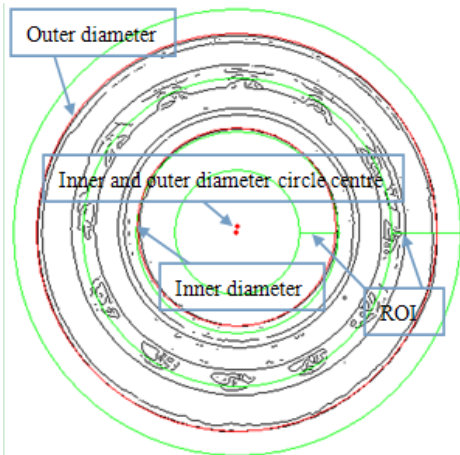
Subpixel fitting of bearing inner and outer diameters and circular centre
